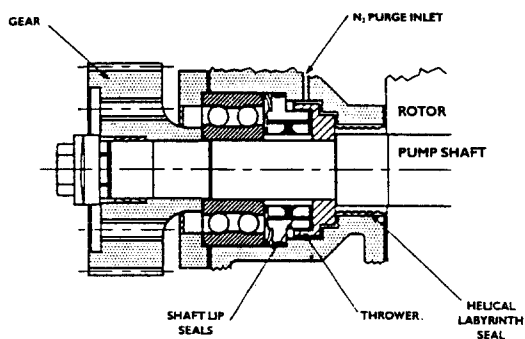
The mechanical arrangement of an inner shaft seal for a dry pump, showing the nitrogen "gas-packing" scheme and the two flow restriction elements.
